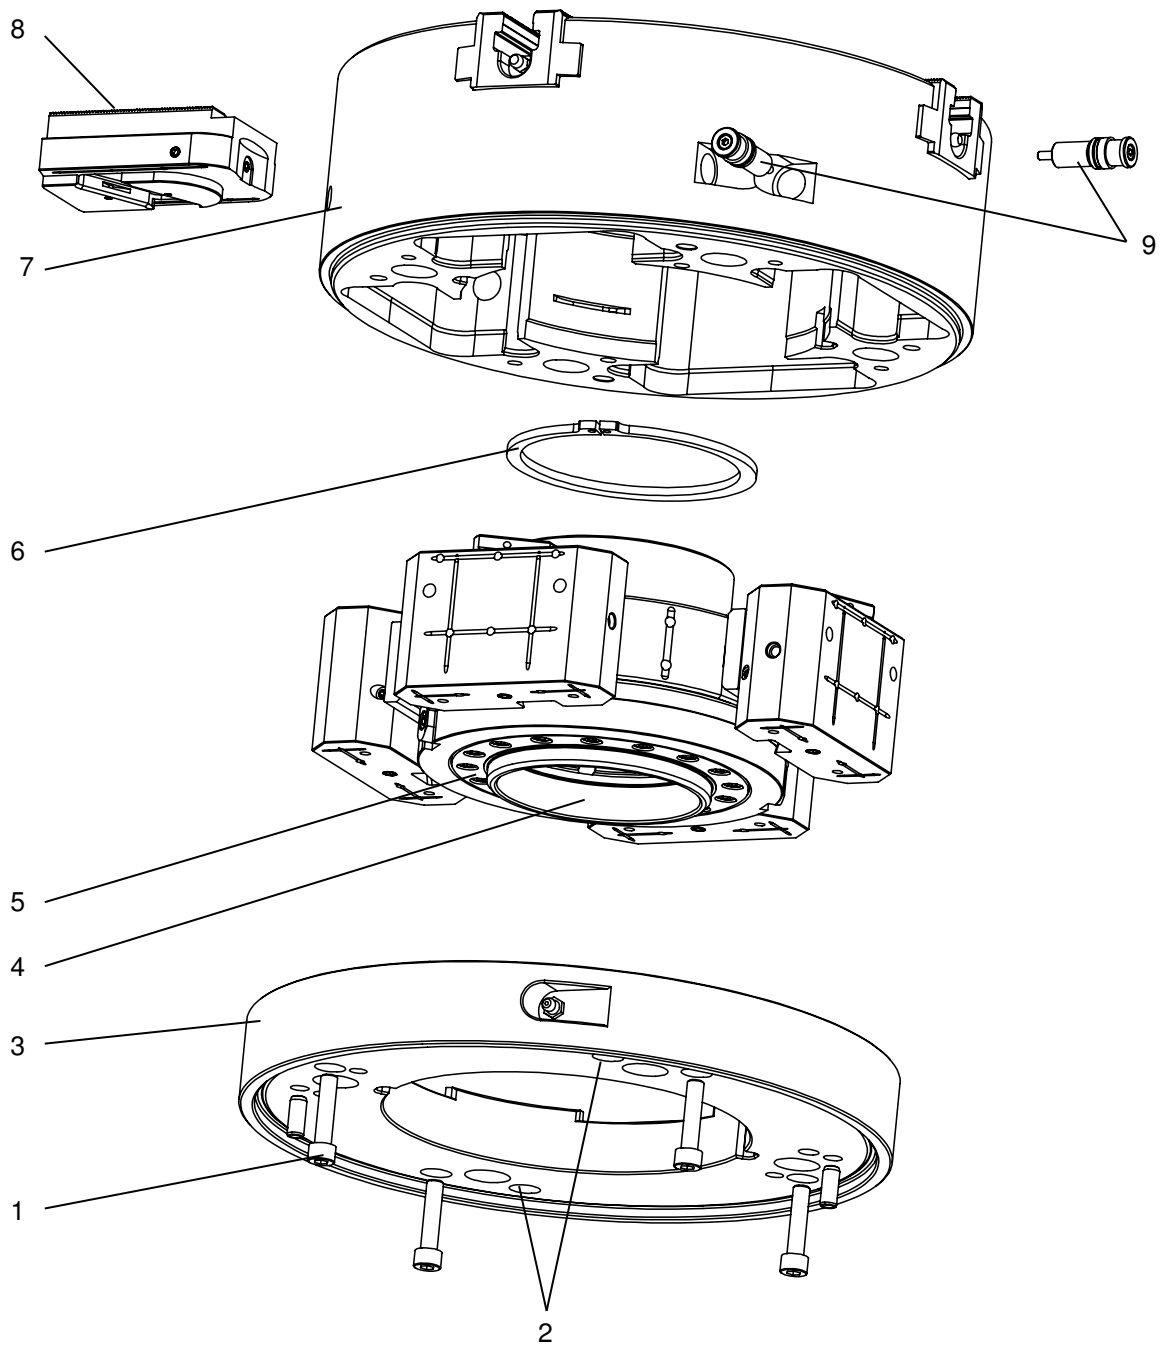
Disassemble/assemble chuck (VT-S 016 – VT-S 080)
